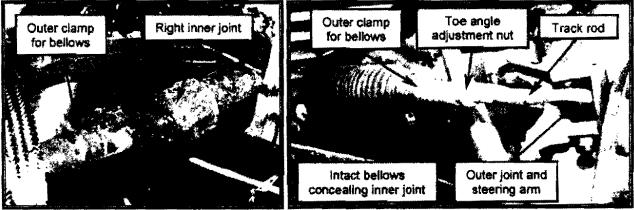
Right inner joint of the rack and pinion steering gear of Vehicle #1. (LASD photograph IMG_0132.JPG)
